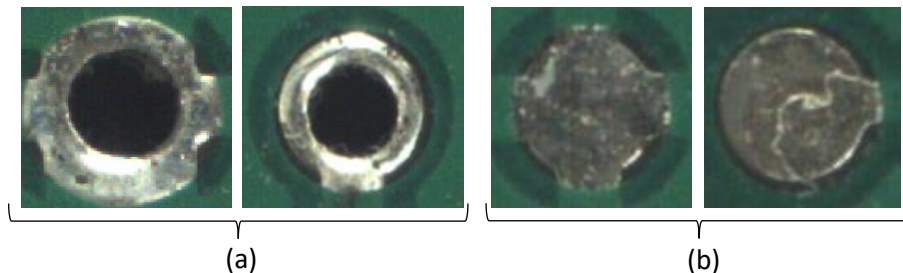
Distinct objects on the PCB in addition to fiducial markings provided by layout designer. (a). Vias available on a PCB. (b). Test Pads available on the PCB
